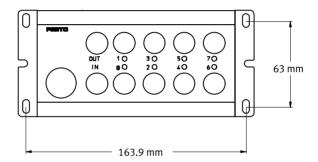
/2: Fitting dimensions for output module CP-A08...-M12-...
